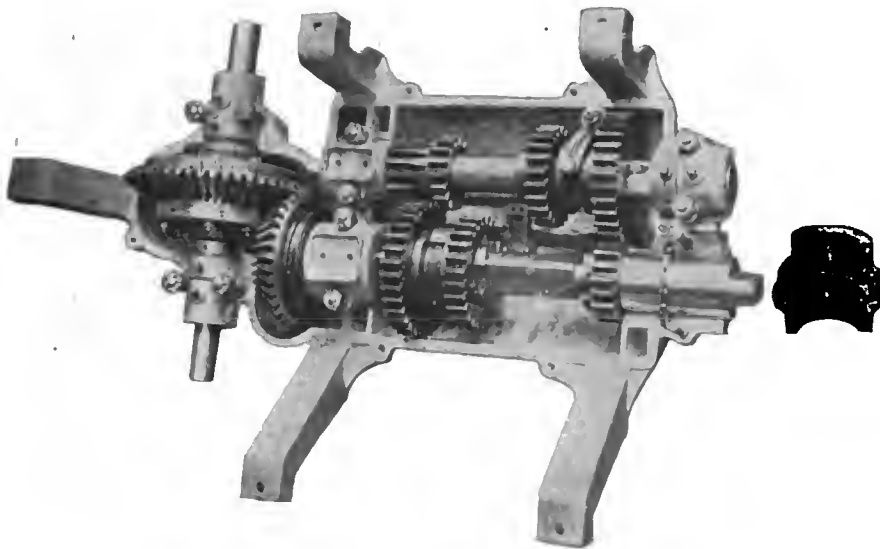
CHANGE-SPEED GEARING AND BEVEL DRIVE TO COUNTERSHAFT.
